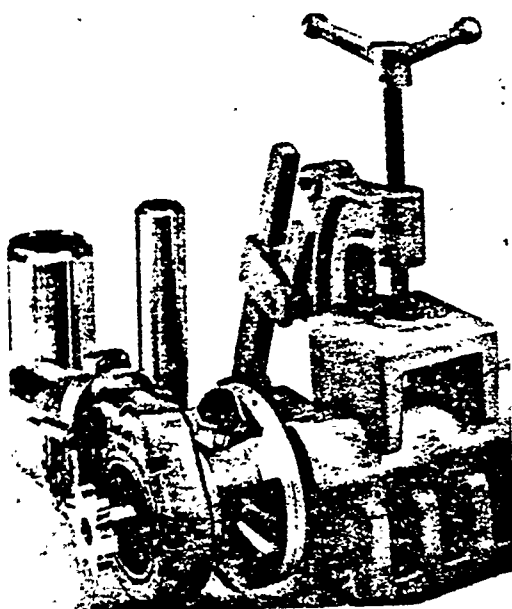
Tri Tool Model 702 Pipe Cutter/Beveler
